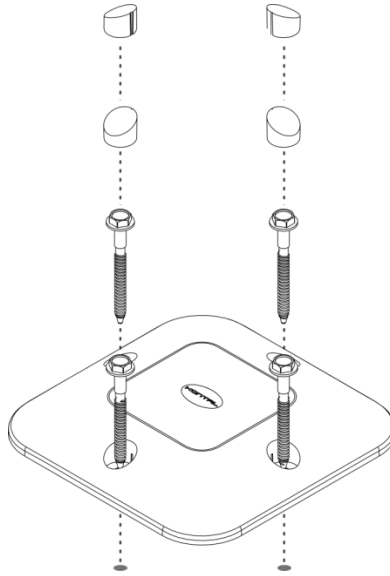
The assembly will be completed by attaching screws and protective plastics.
